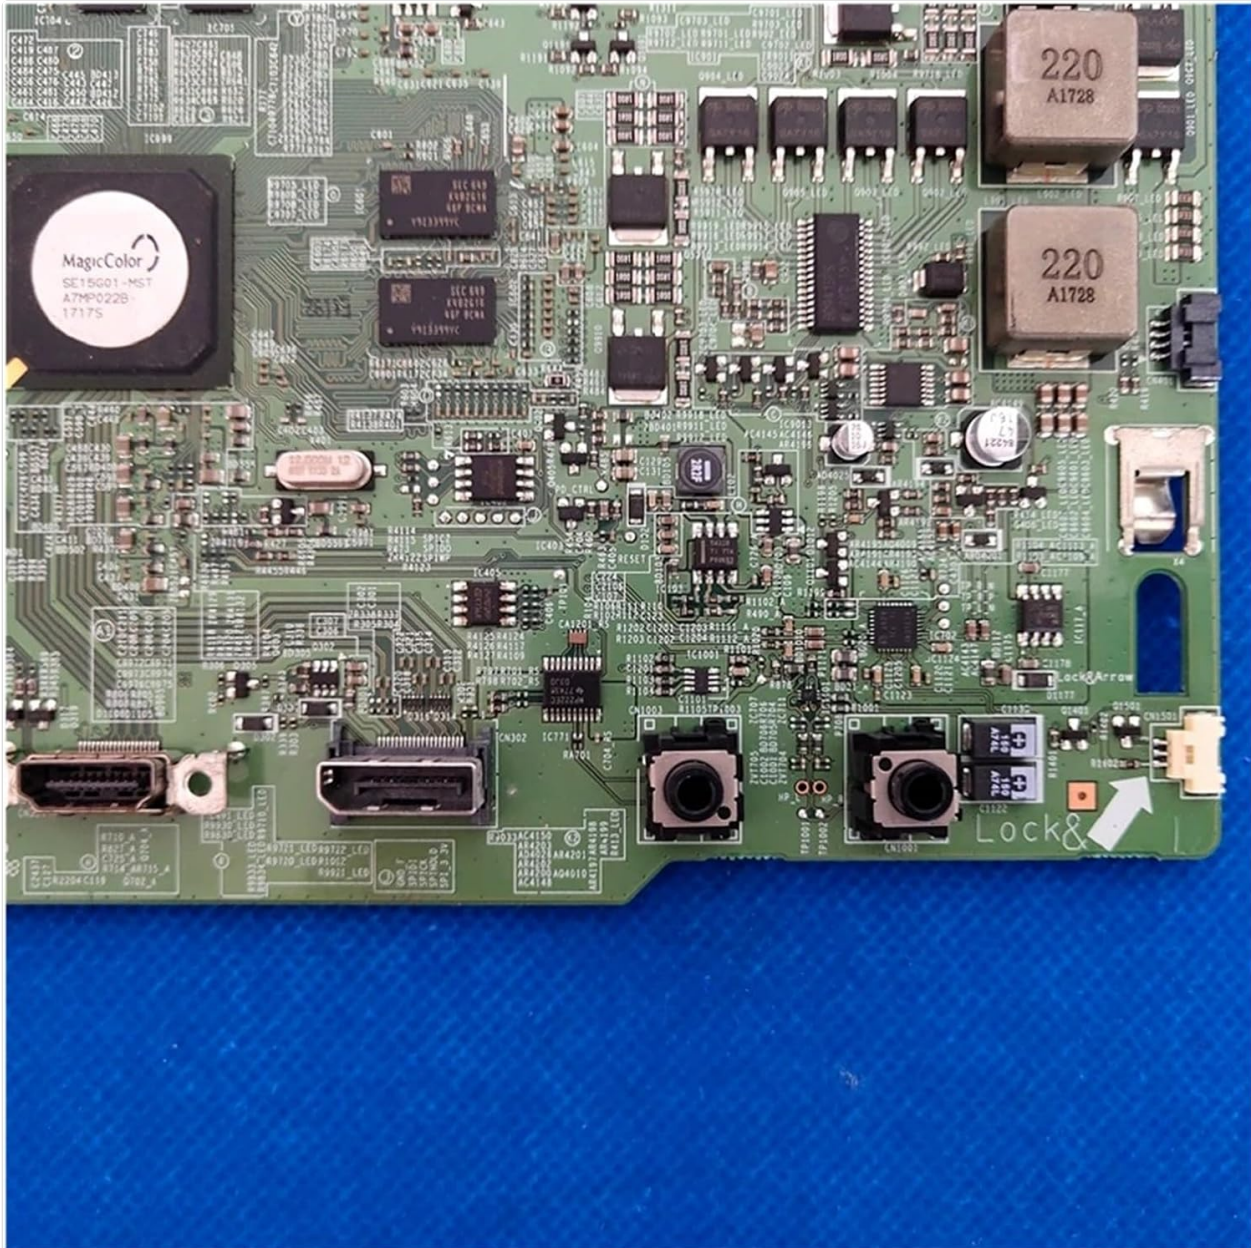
Detailed view of the main board's various connectors, including HDMI ports and control buttons, essential for proper reassembly.
